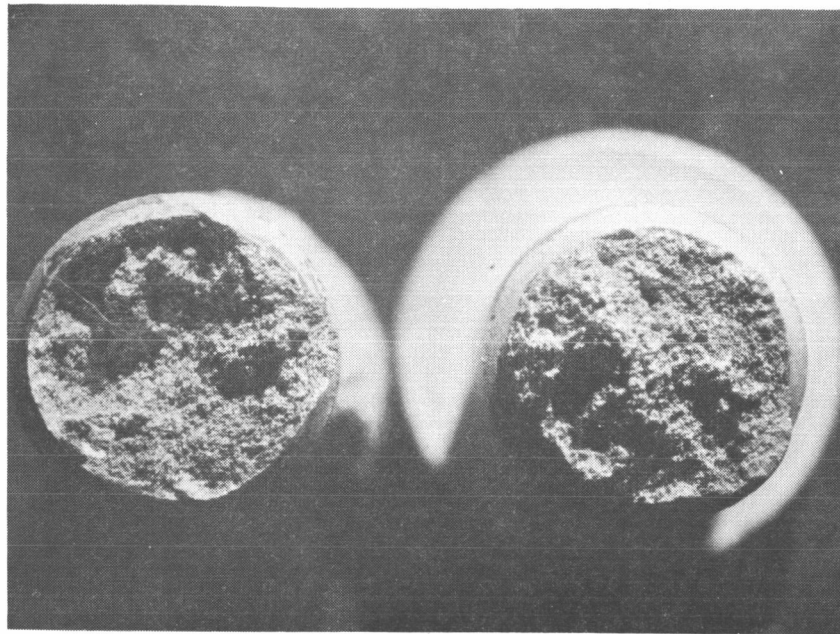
FRACTURE SURFACES, SPECIMEN 3, 8X
